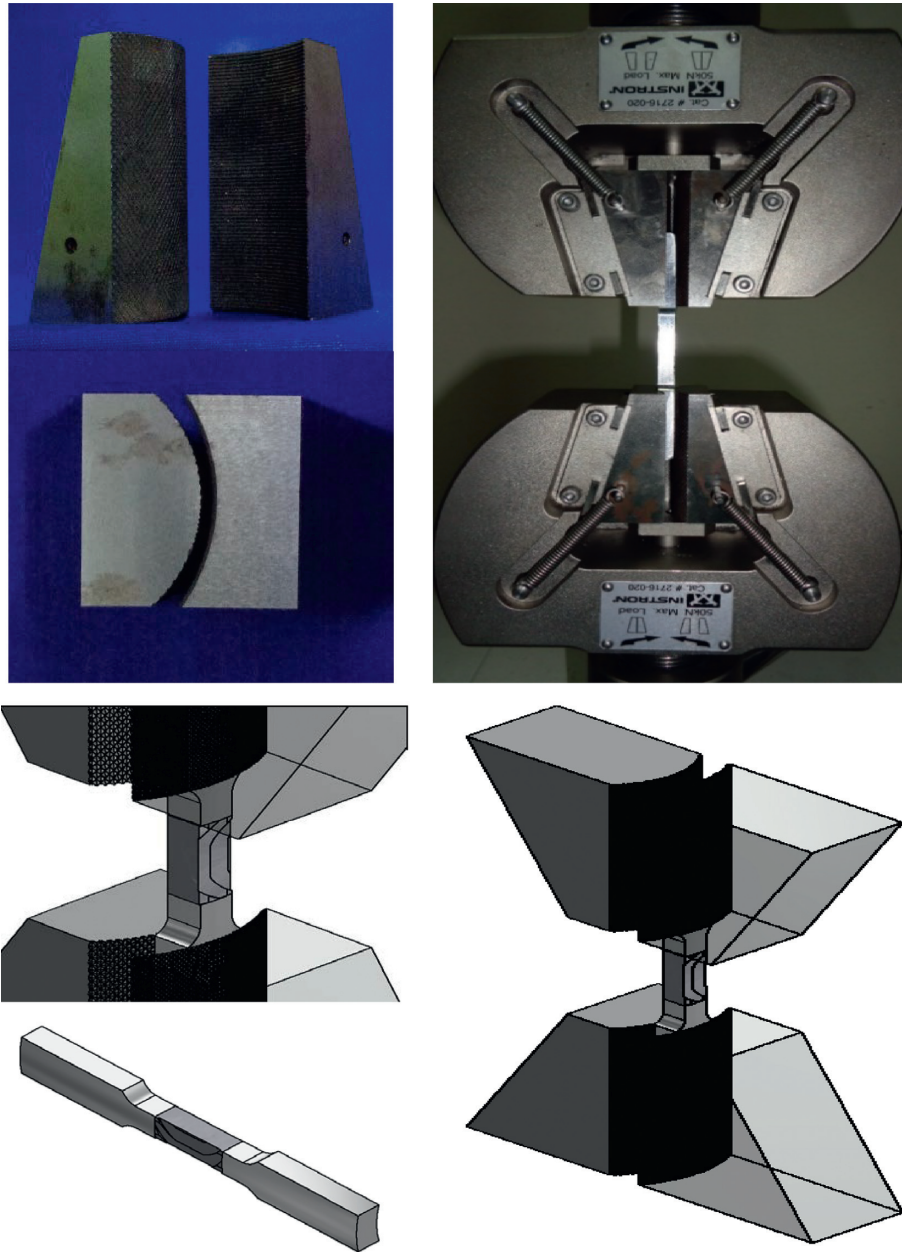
Universal testing machine and friction stir-welded AA 7075 aluminium alloy.
